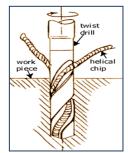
Cross Section of a hole being cut by a Twist Drill
